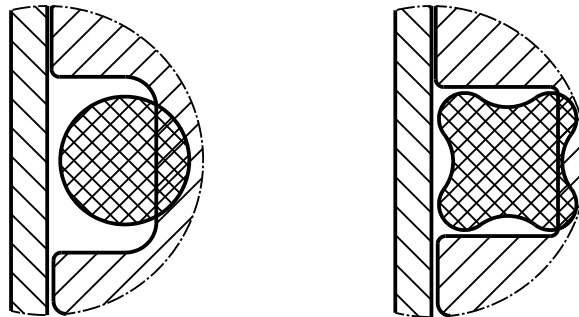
Floating piston's groove and seal design changes to minimize the seal's mobility: O-ring and original groove (left) and X-ring and adjusted groove (right)
